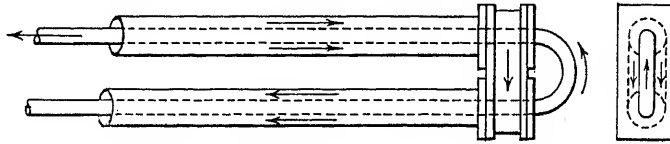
SECTION OF COOLER, CONCENTRIC TUBE.
